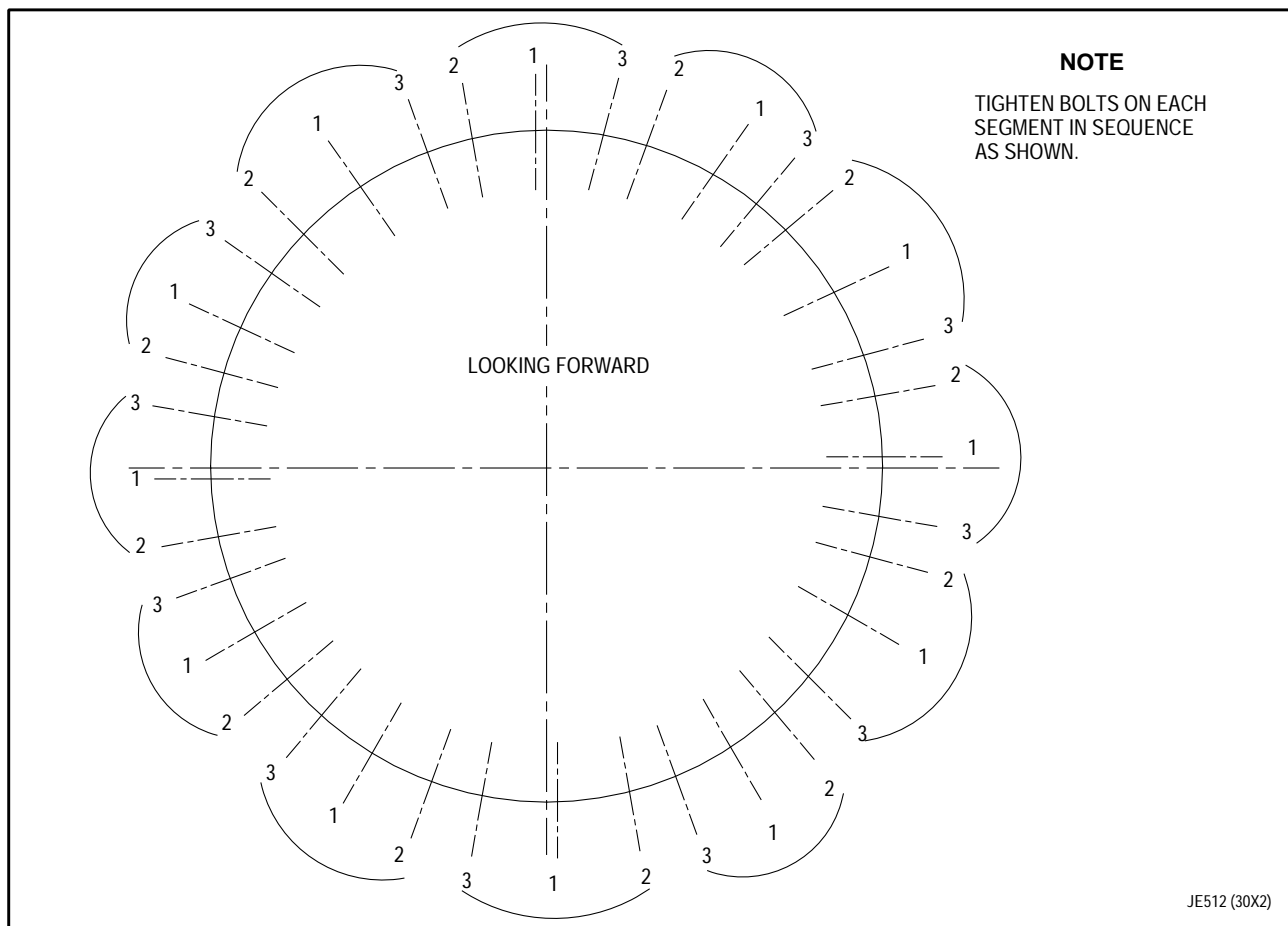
Tenth Through Twelfth Stage Case To Stator Segment Bolts - Torque Sequence
